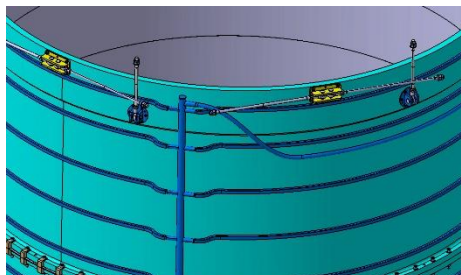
Zoom on the thicker part of the aluminium support cylinder in which a pipe has been added.
